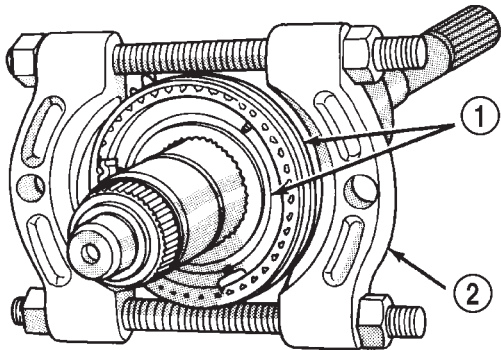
SECOND GEAR AND NEEDLE BEARING
